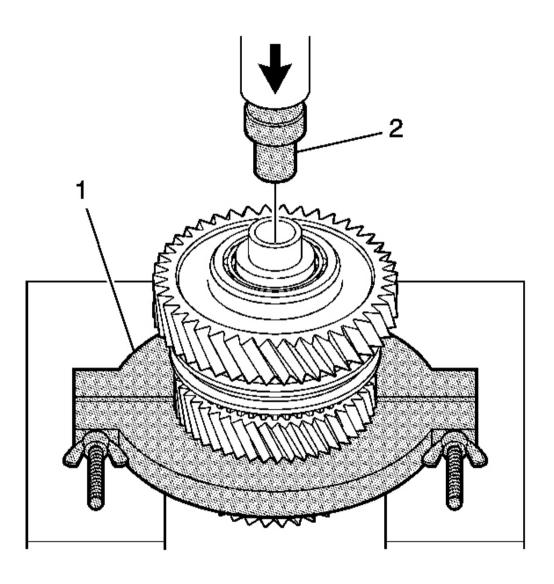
Pressing Off 1st & 2nd Gear Assemblies Courtesy of GENERAL MOTORS CORP.
